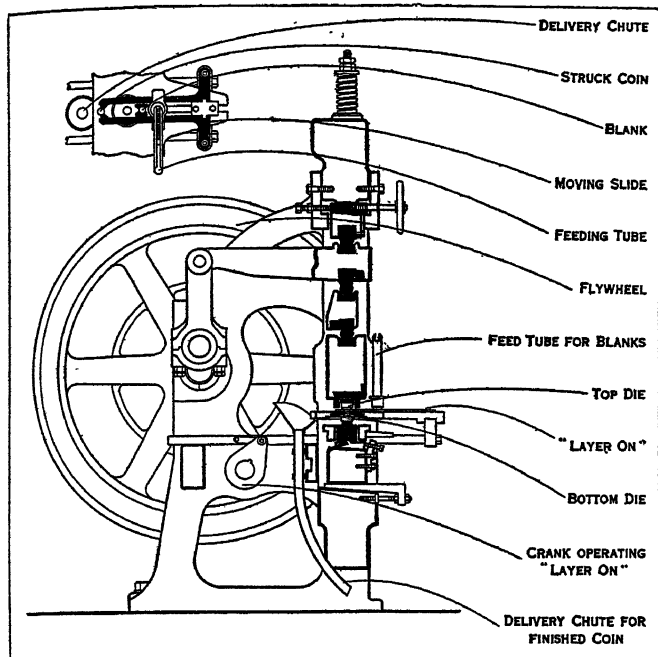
COINING PRESS SHOWING THE MASSIVE STRUCTURE OF A MODERN PRESS, WHICH RETAINS ITS RIGIDITY WHILE STRIKING A HEAVY BLOW EQUIVALENT TO A PRESSURE OF MANY TONS
